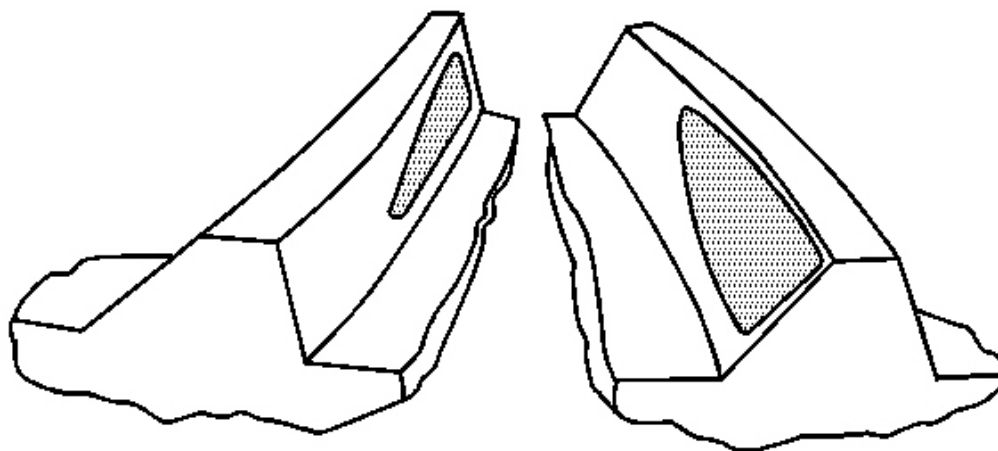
Identifying Drive Side Toe - Coast Side Heel Contact Pattern
